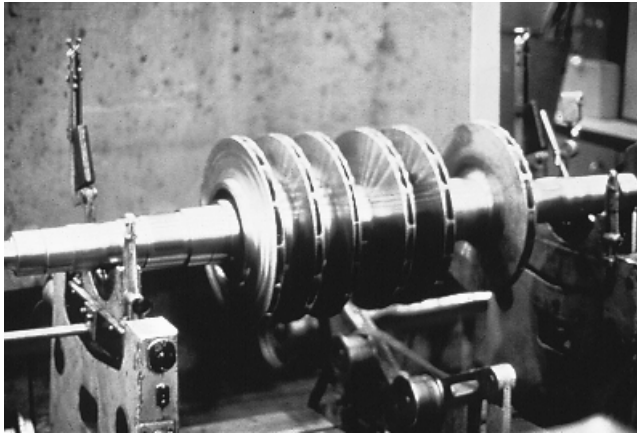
Centrifugal compressor rotor being balanced. (*Dresser-Rand Company, Olean, N.Y.*)
